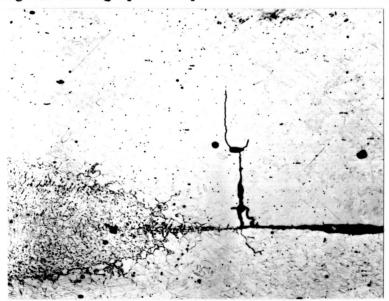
Same spot weld as shown in Figure 5 except at a higher magnification so that the four fine cracks are made visible. The shortest crack is 0.0005" while the longest crack is 0.0015" (respectively 5% and 16% thru the sheet thickness.
